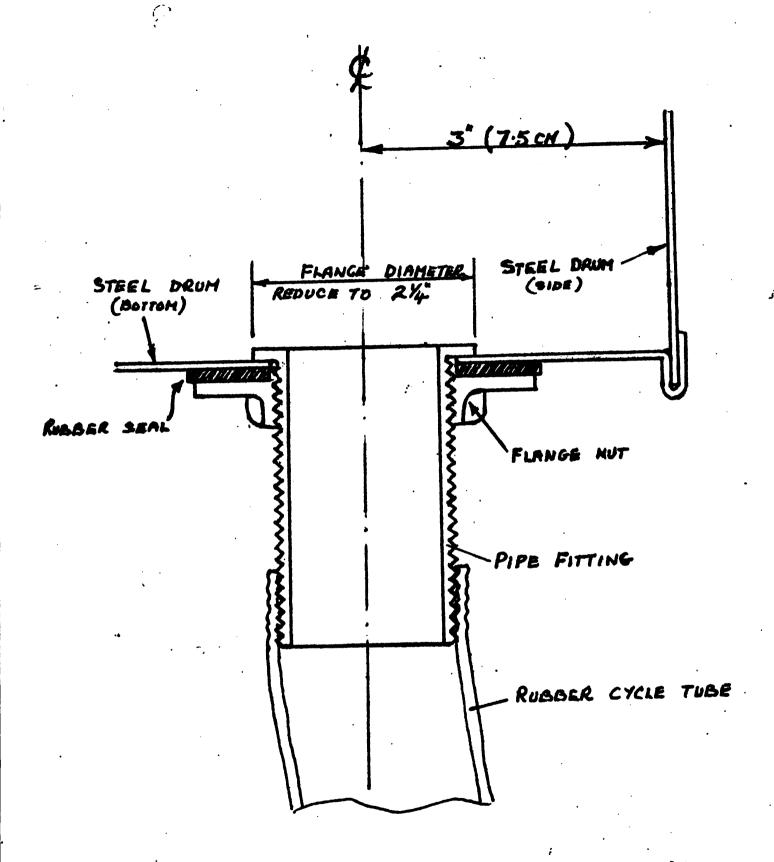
SECTIONAL VIEW - SHOWING PIPE CONNECTION TO STEEL DRUM
